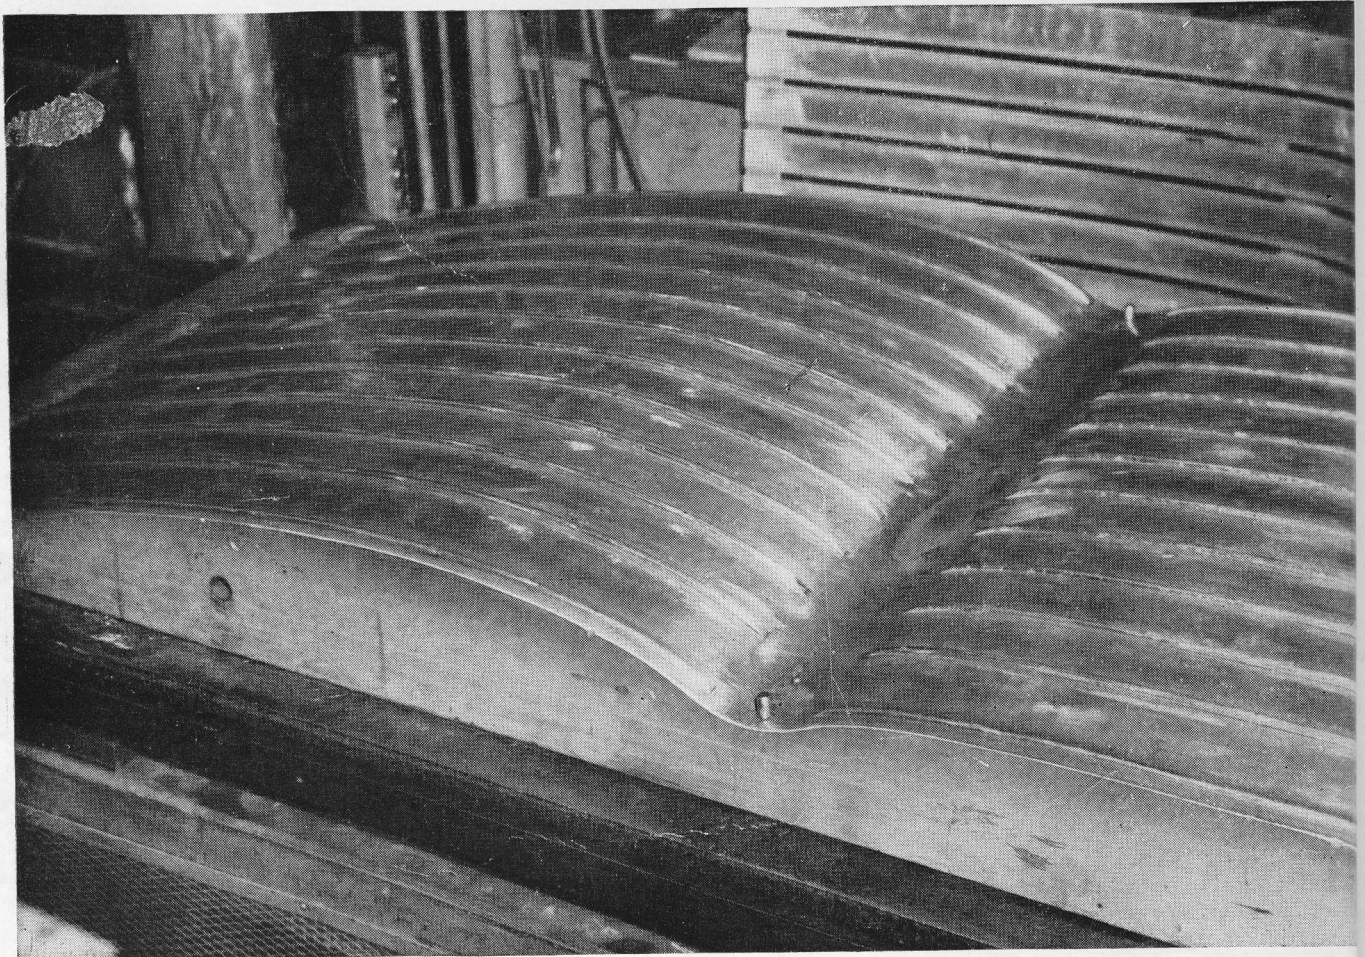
Camel-back draw die for forming skins. This is a temporary tool used until a production unit was available. It was employed with a steel mat (seen in the background) which gives sharp impressions of the beads with hydraulic press utilizing a rubber female. With the mechanical press, a steel female would obviate the need for a mat.
